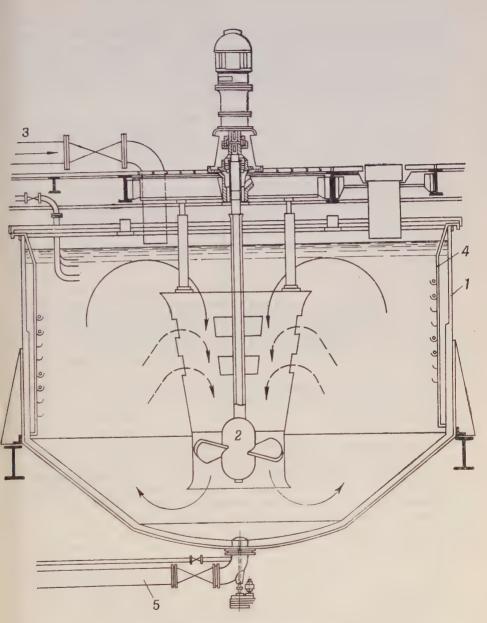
Mechanically agitated tank: 1—tank; 2—impeller; 3—feed pipe; 4—heating coil; 5—discharge hole
